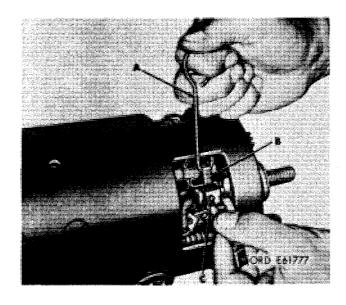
Removing or installing brushes in brush rigging using improvised brush spring lifter.
